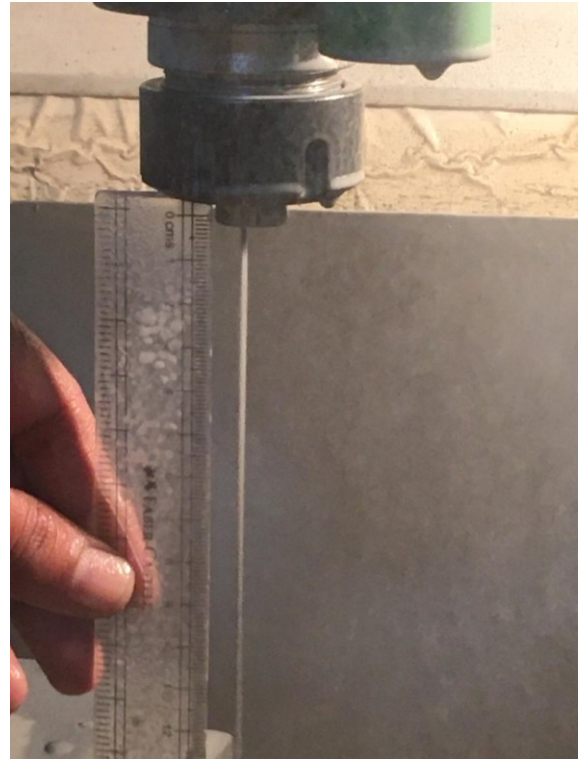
BT40 coolant inducer tool holder assembly used in the present work.
